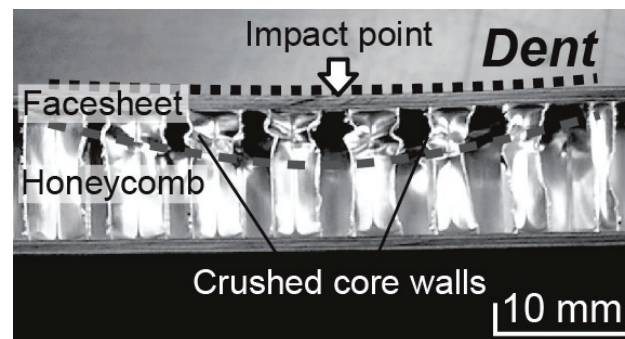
Cross-sectional view of impact damage in composite sandwich structures.
